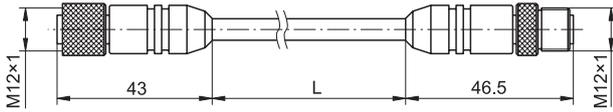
Connecting cable BSK-S103/GS203-CP-...
